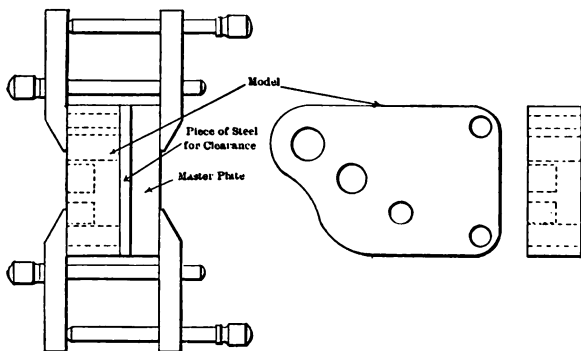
Model Master Plate and Protecting Piece Clamped Together.
